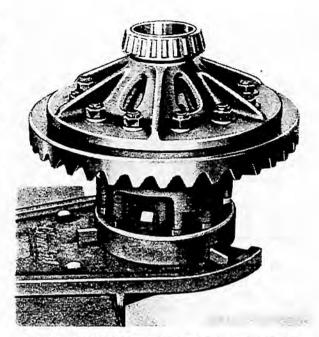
DIFFERENTIAL CASE ASSEMBLY ON STAND
